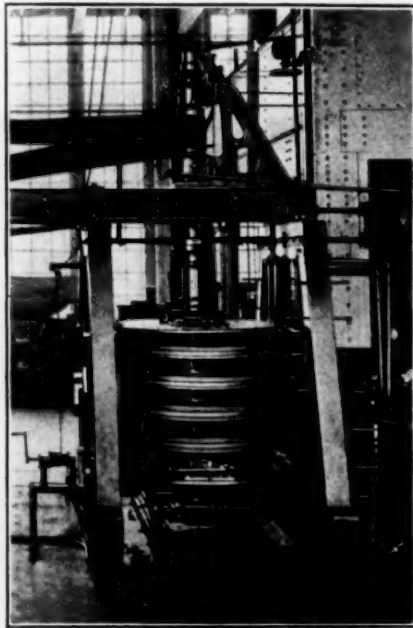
TYPICAL VERTICAL BALANCING MACHINE
